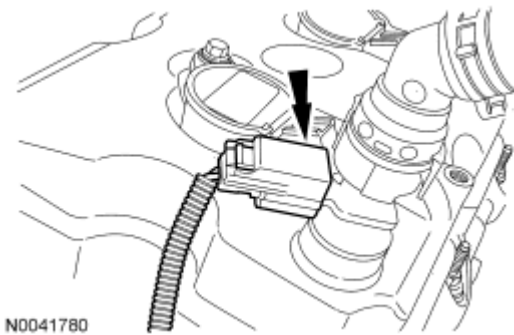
Locating Positive Crankcase Ventilation Valve Electrical Connector
